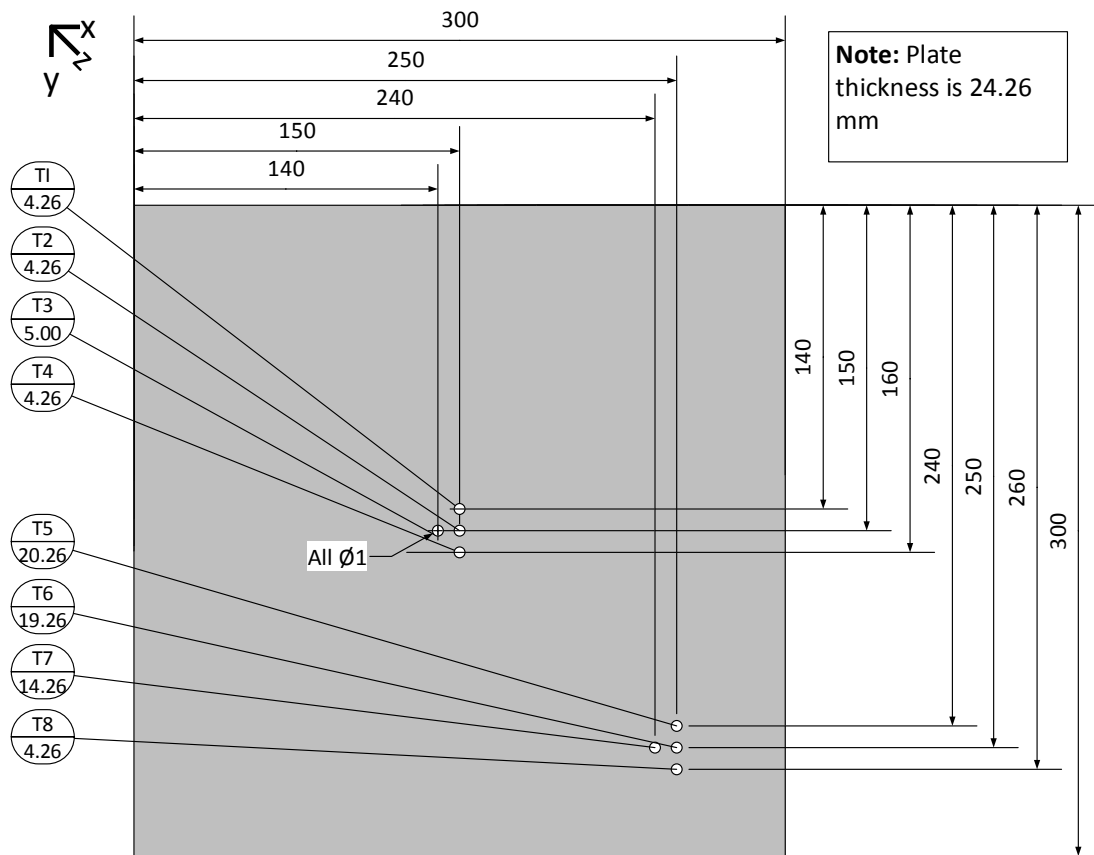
Engineering drawing of Steel base set up - bottom view where the depth is mentioned below the thermocouple label (All dimensions mentioned in mm)
